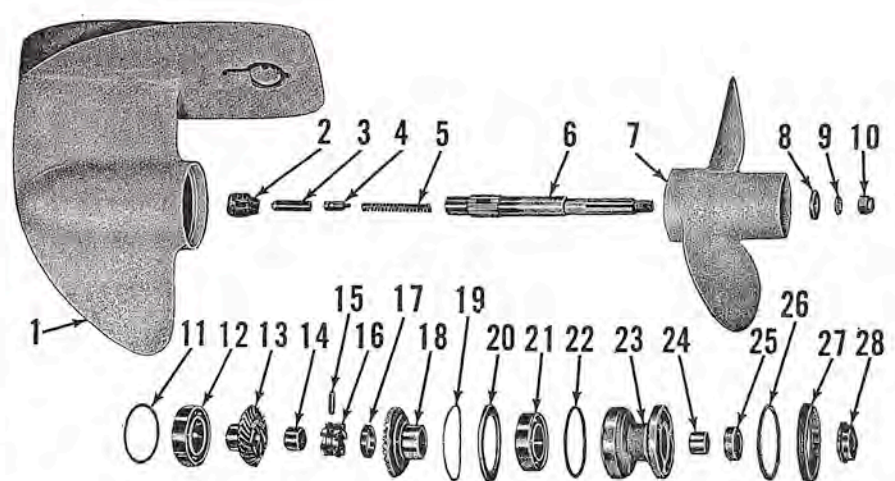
Exploded view of lower unit gearcase and associated parts. See also Fig. M40.
